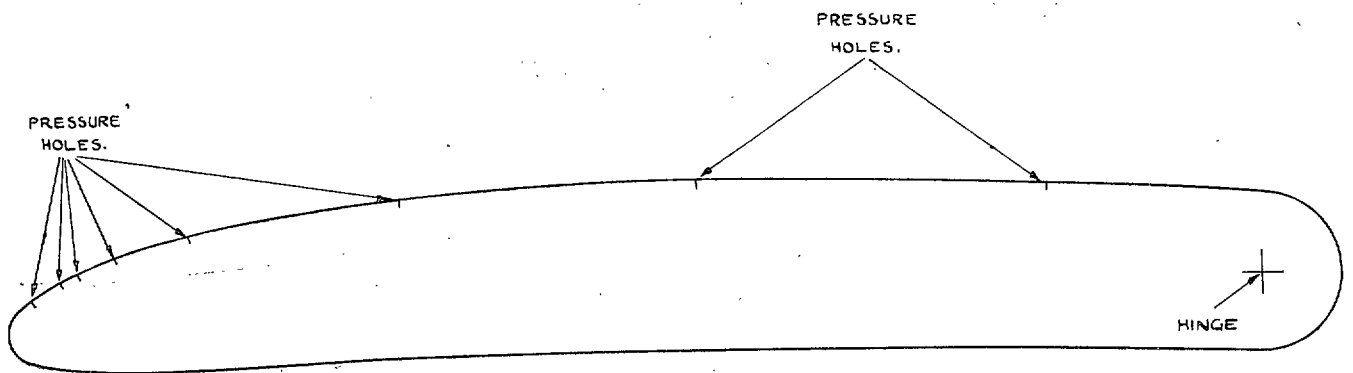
Section of front radiator flap, showing positions of pressure holes.
